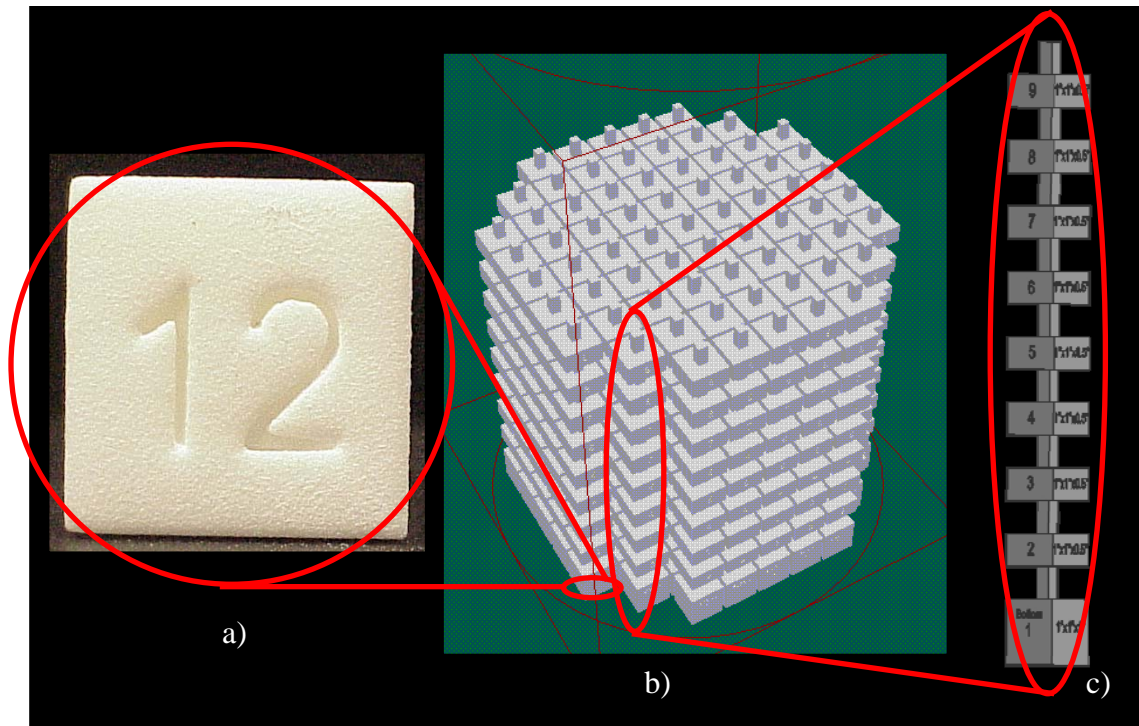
View of nylon scale piece (a) bottom (b) build layout (c) CAD model
